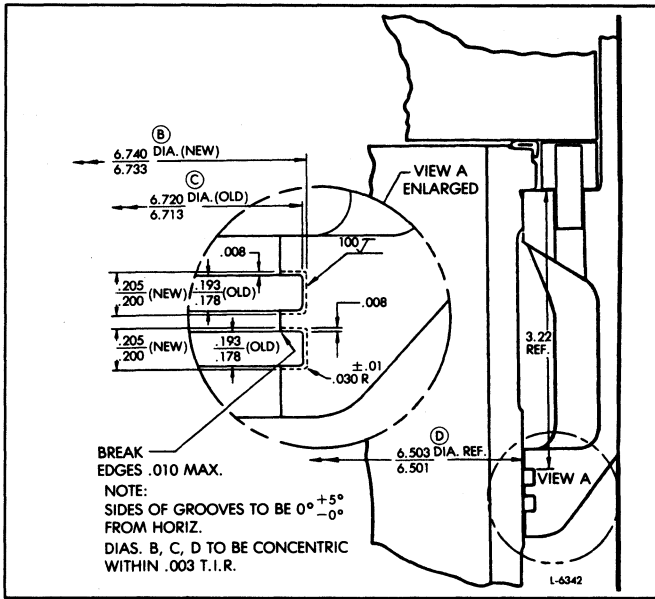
Liner O-Ring Groove Rework Dimensions
